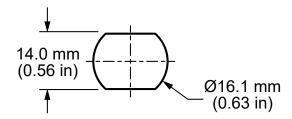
ANT-W63-SPNF1 Mounting Hole Dimensions
